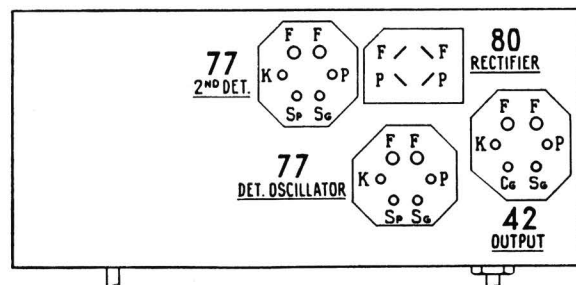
Tube Socket Layout (Viewed from Bottom)
